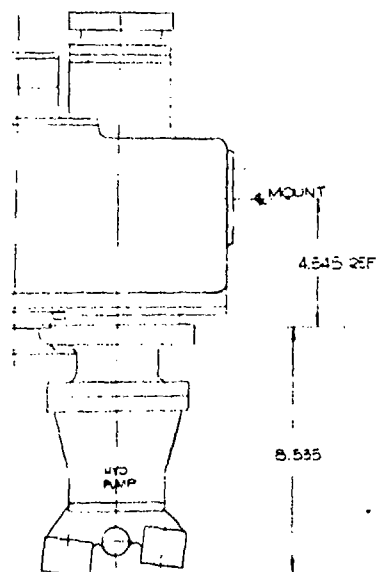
shows the installation of the accessories and the gearbox design, which consists of two separate gearboxes coupled by a torque converter. The first (APU gearbox) is coupled to the APU shaft and contains the APU starter motor shaft, accessories, and the torque converter drive. The second (ADS gearbox) is coupled to the main engine input and drives the hydraulic pumps, the lube pump, and the VSCF generator. The main-engine drive is coupled to the torque converter output through an overrunning clutch, which starts the main engine with APU shaft power but does not allow the main engine to drive the APU. When the engine speed exceeds the torque point, the APU may continue to operate or may be shut down, if not required for another purpose, since it no longer furnishes power to the engine or accessories. With the main engine decoupled, the APU would be capable of driving the main engine accessories at a speed corresponding to engine-idle. The gearing schematic and the APS component design data are illustrated on Table XXVI and Figure 189.
